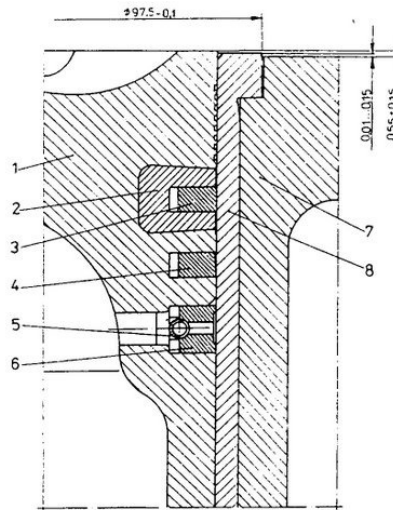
Cylinder liner and piston position over a cylinder block upper surface
